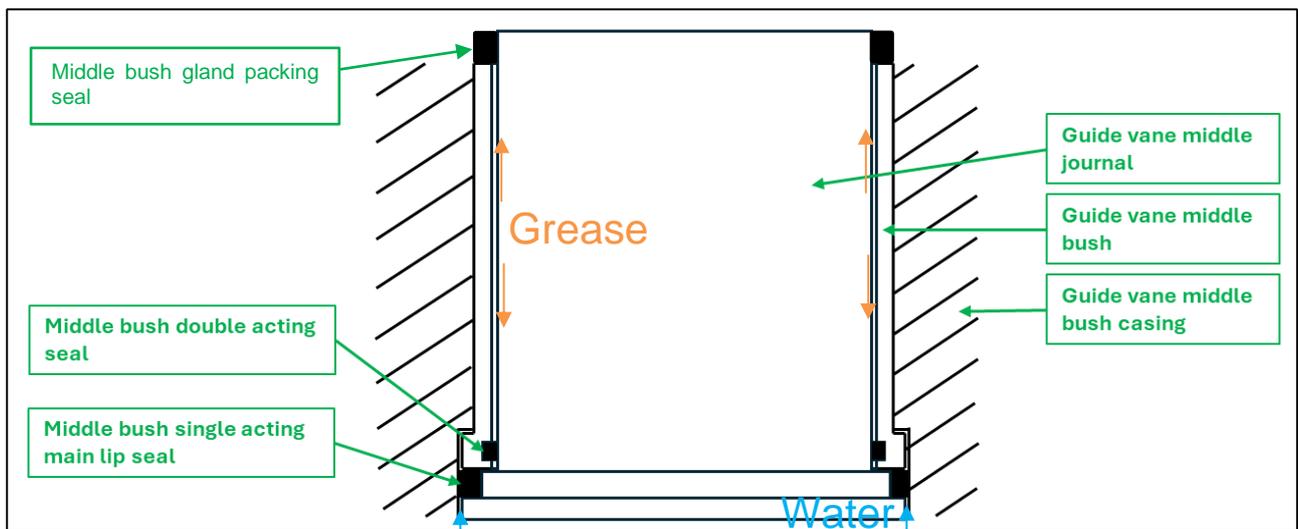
Guide vane middle bush & journal assembly side view - illustrating location of seals
